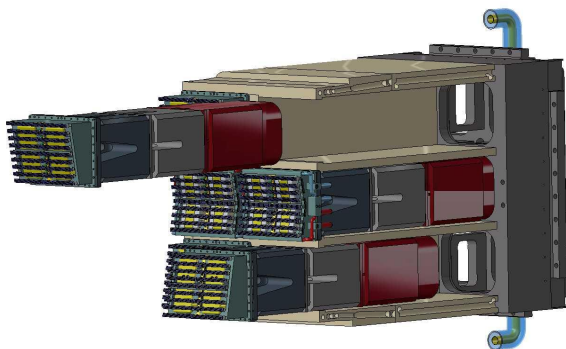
Assembly of the front module in the port plug (lateral plate not shown)
